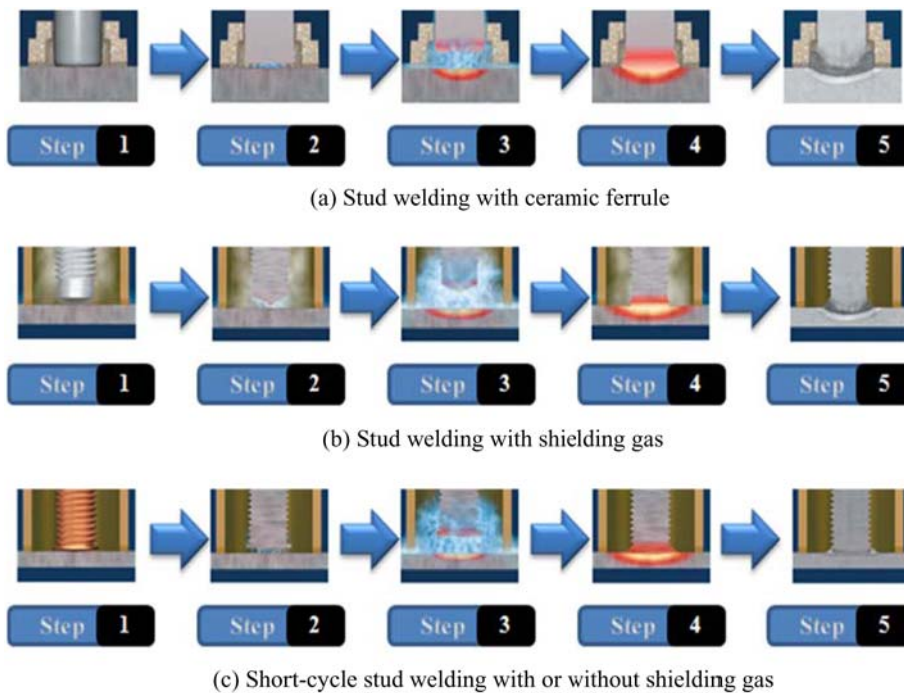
Drawn arc stud welding processes (Köster Co., 2013).
